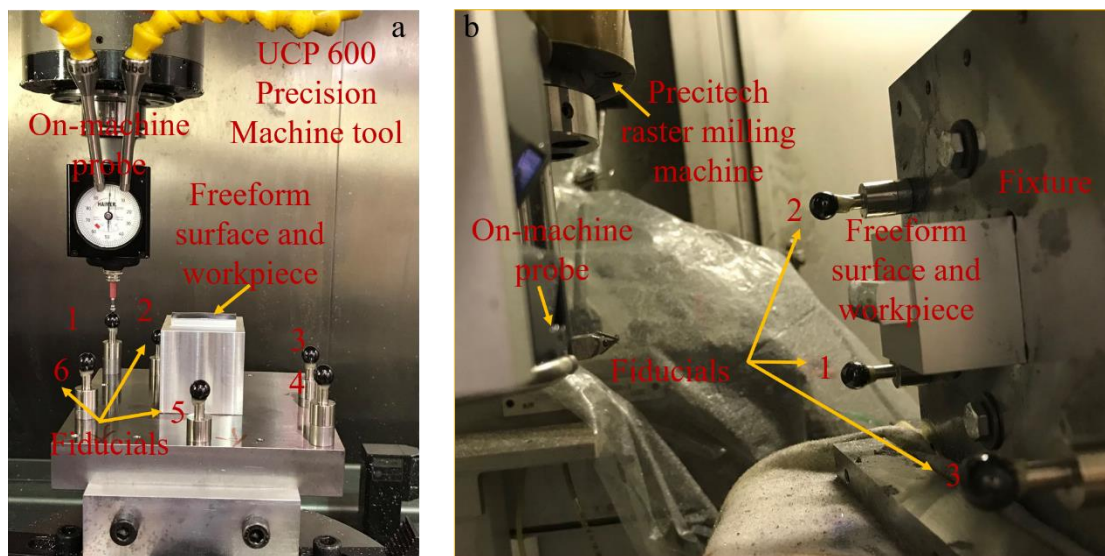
Two configurations of the designed fiducial-aided fixture for two different machine tools: (a) application in the UCP 600 precision machine (b) used in the Precitech raster milling machine
